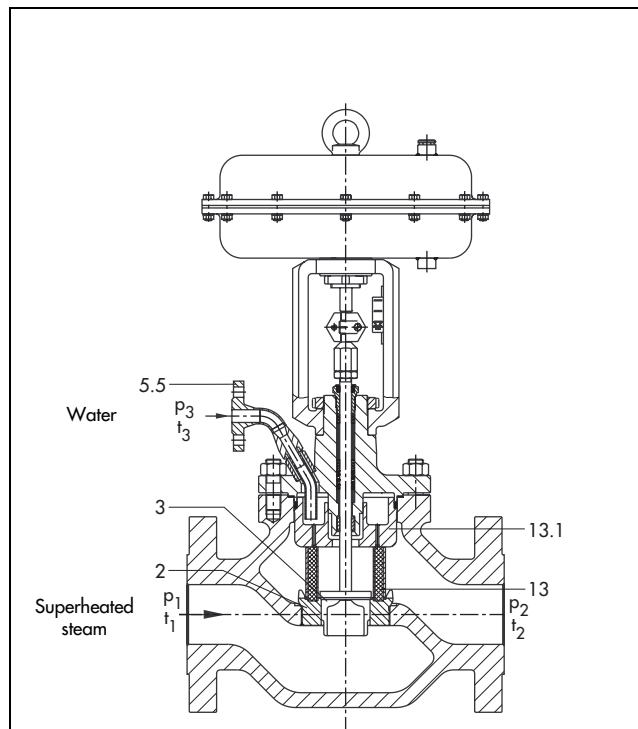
· Type 3281-1 Pneumatic Steam Converter with flanges and Type 3271 Actuator
